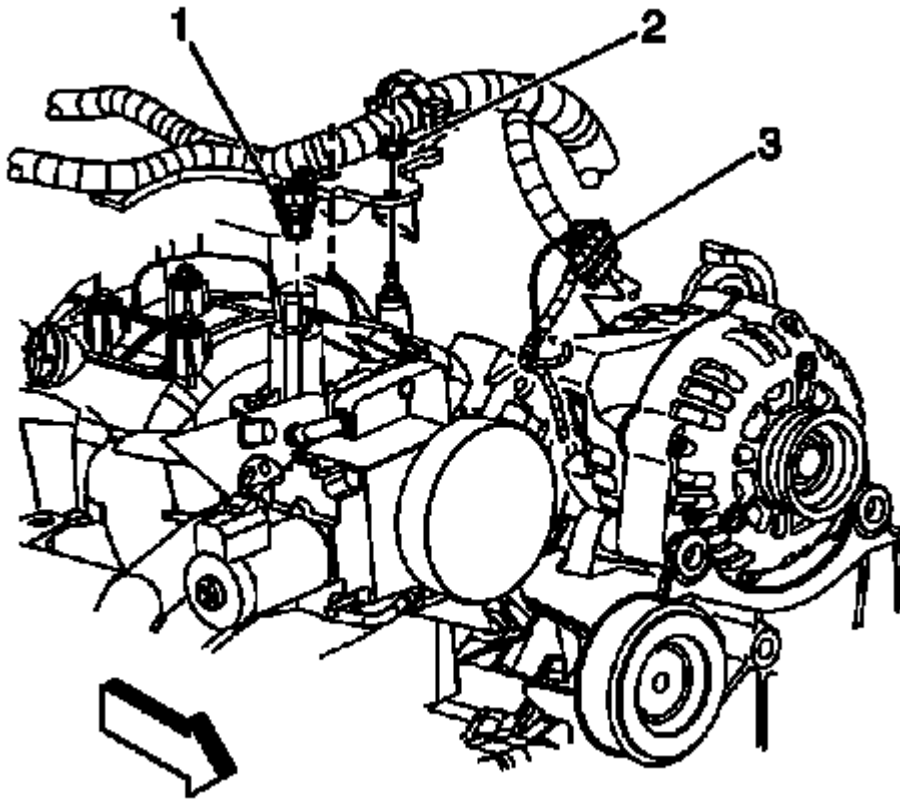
Identifying Purge Solenoid Electrical Connector, Wiring Harness Nut & Generator Electrical Connector
